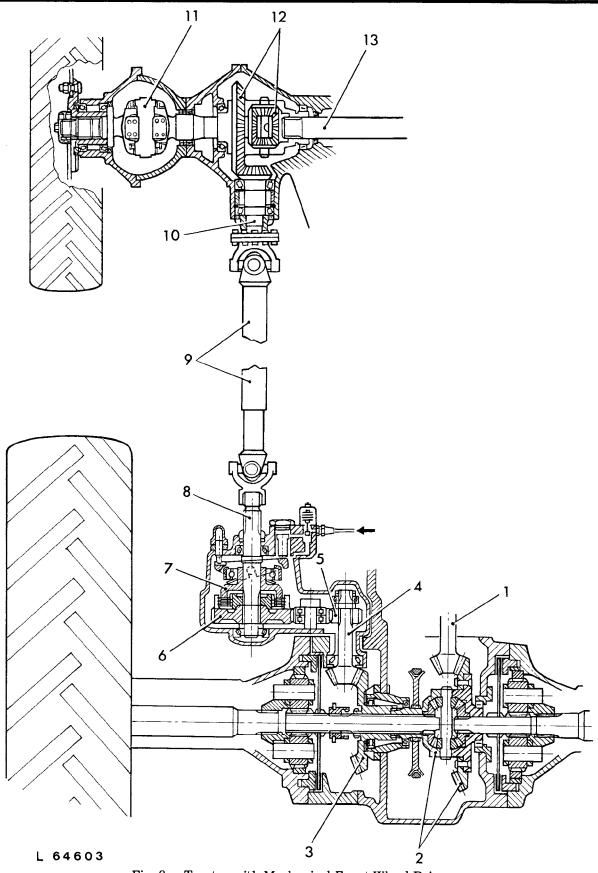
Tractor with Mechanical Front Wheel Drive (Refer to Page 9 for explanation of items 1 to 13)
